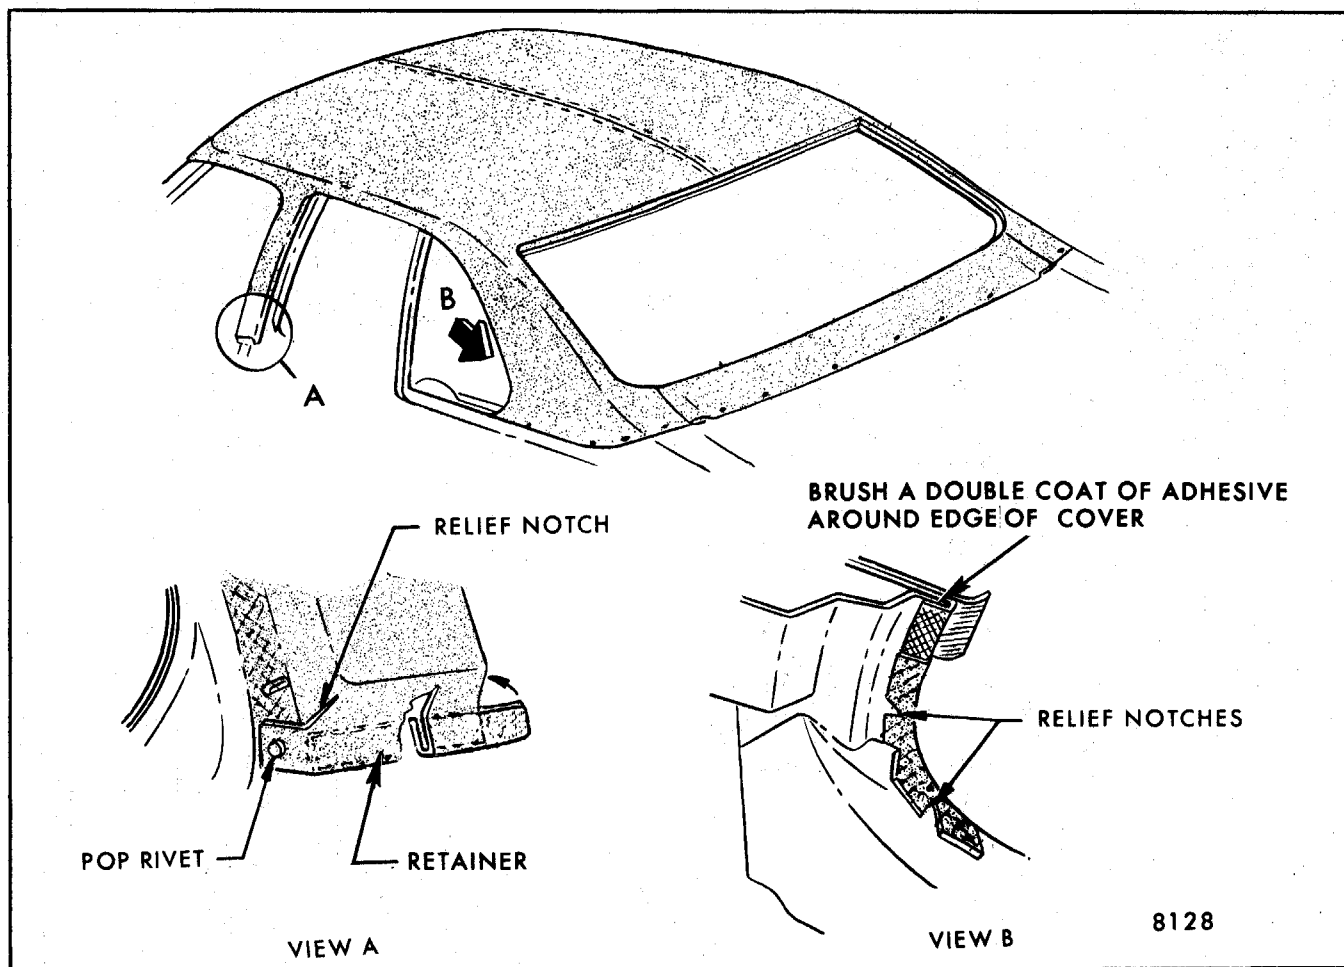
Fabric Roof Cover Installation at Center Pillar and Quarter Window - "A-29" Styles
